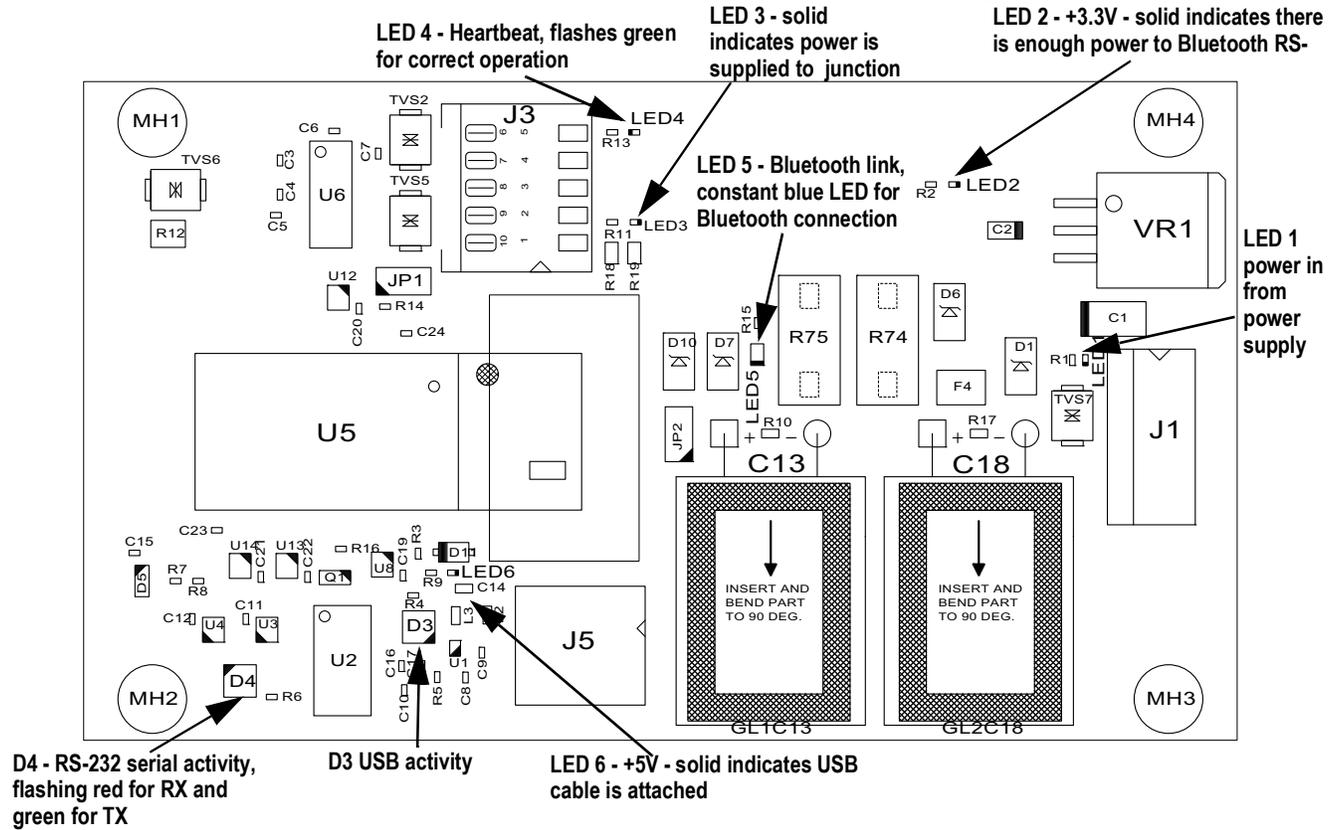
Troubleshooting iQube2 PCB Assembly LEDs (PN 162508)
